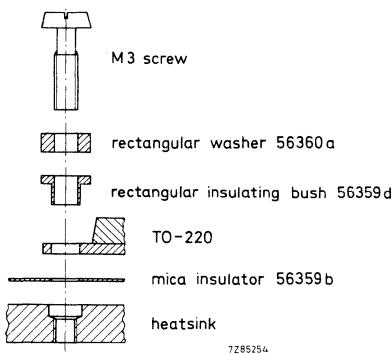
Insulated screw mounting with rectangular washer into tapped heatsink. Known as a "top mounting".
